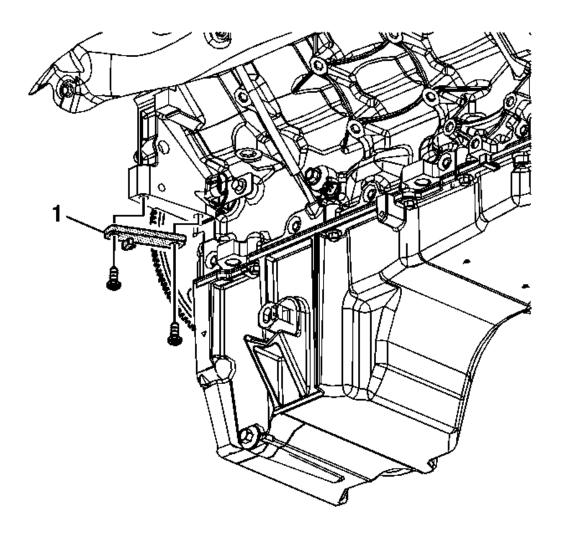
View Of Special Tool & Bolts Courtesy of GENERAL MOTORS CORP.
